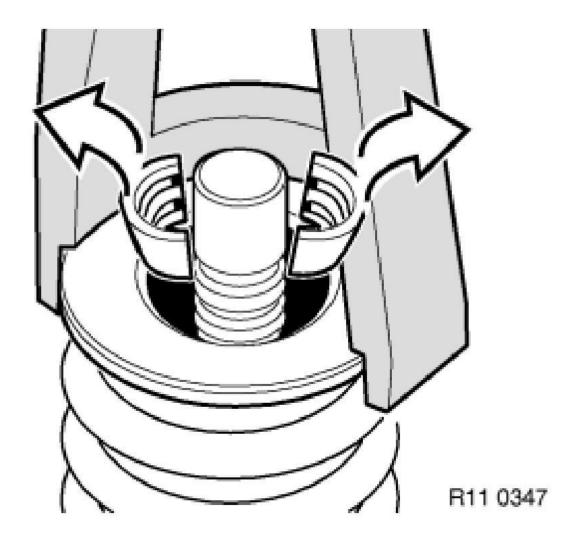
Removing Valve Spring Courtesy of BMW OF NORTH AMERICA, INC.
